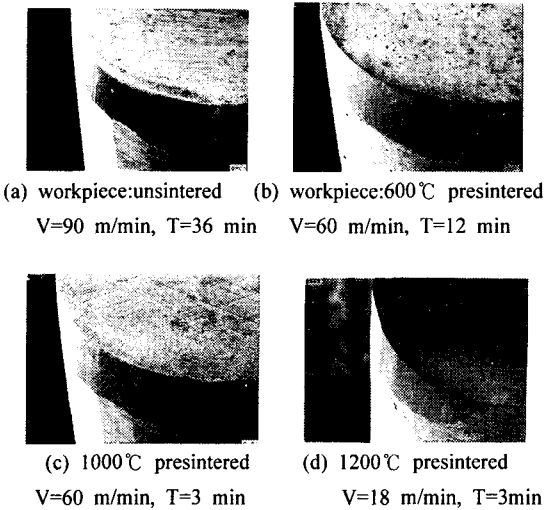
Typical wear patterns of the K01 grade tools after dry machining of unsintered and presintered ceramics
